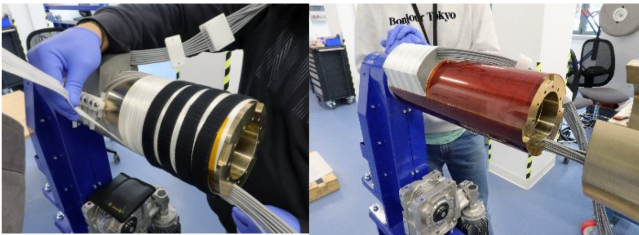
(Left) insulation wrapping (right) outer layer positioning prior to assembly.
